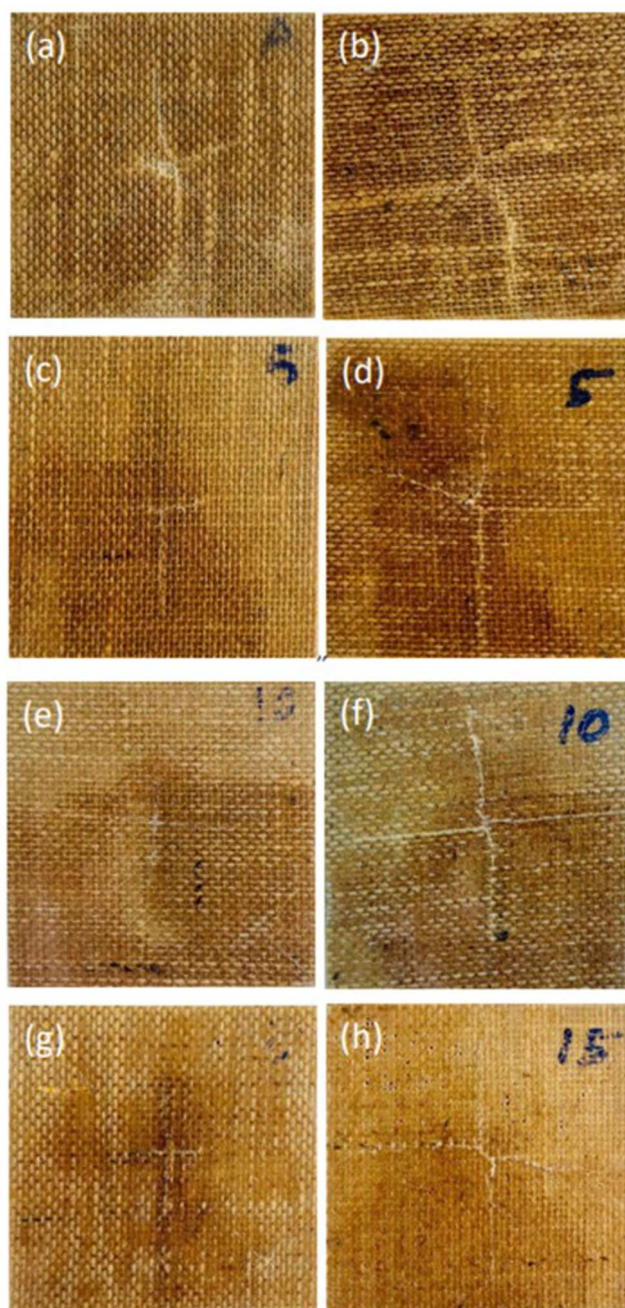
Morphological images of composites subjected to impact (a) Front Face—Z0, (b) Rear Face—Z0, (c) Front Face—Z5, (d) Rear Face—Z5, (e) Front Face—Z10, (f) Rear Face—Z10, (g) Front Face—Z15, and (h) Rear Face—Z15.
